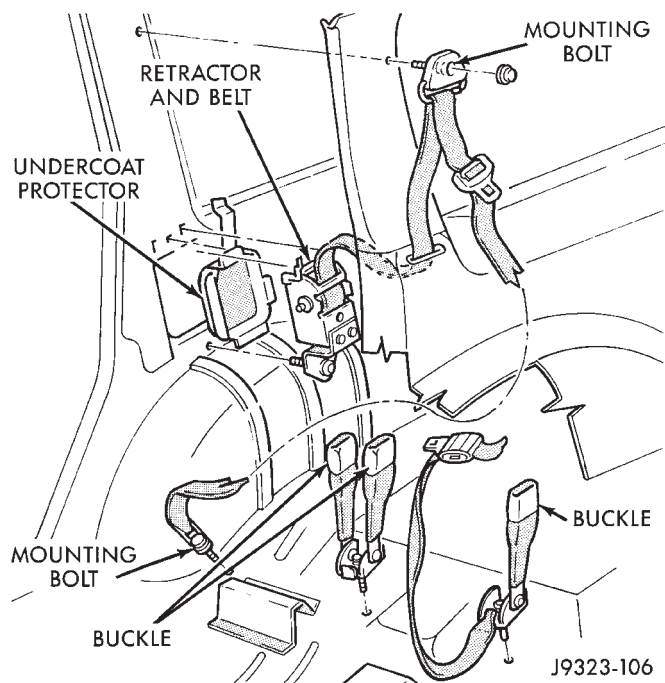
Rear Seat Shoulder/Lap Belts & Buckles
